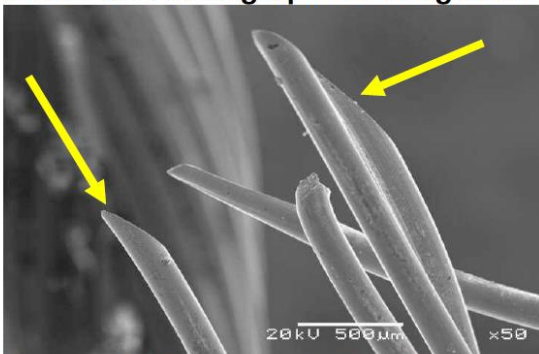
Fractograph showing outer strand wire fractures (x50, SEM)
